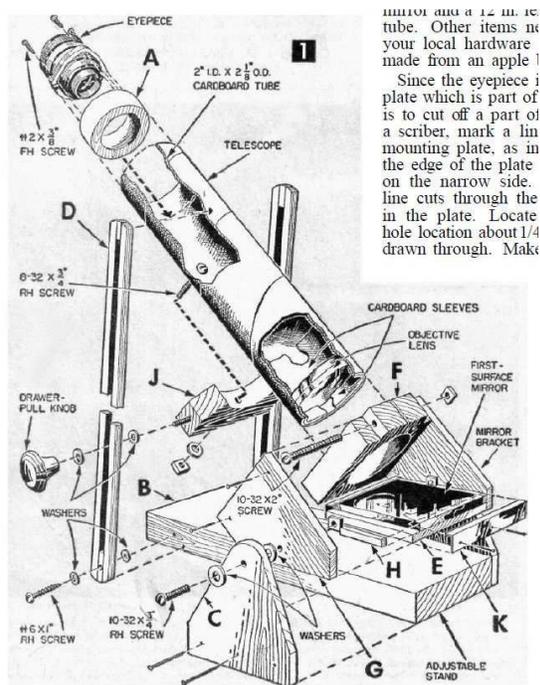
(left) The Science and Mechanics drawings for the assembly of the \$9 scope.
